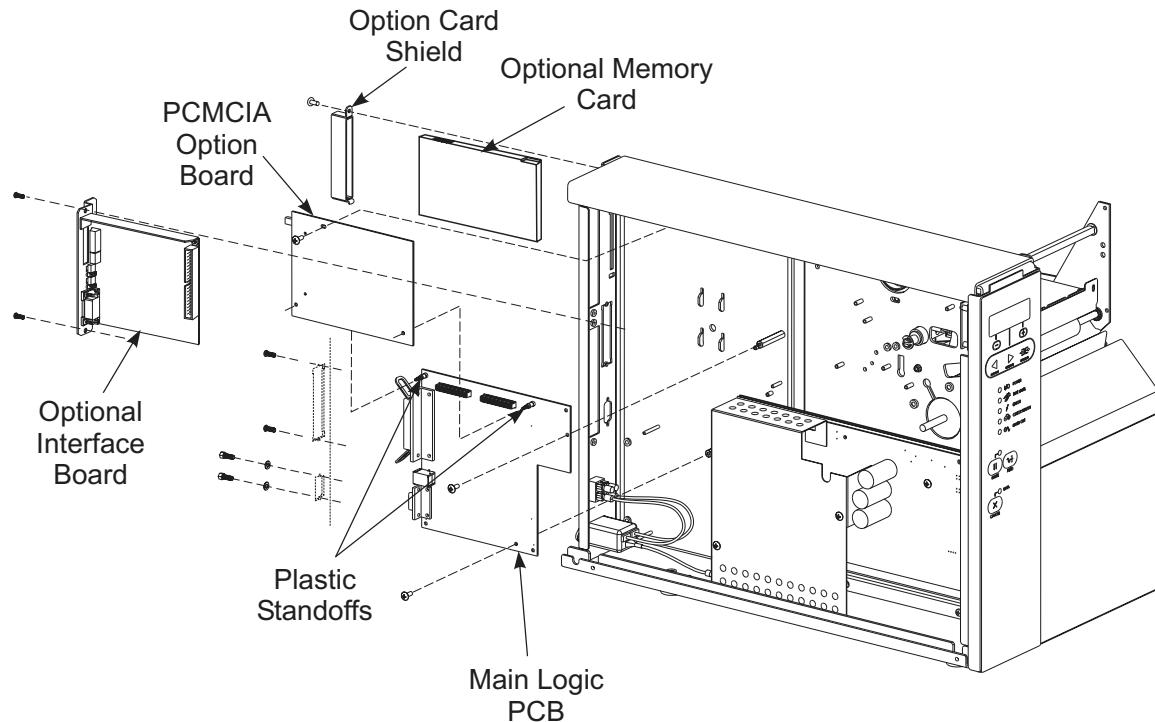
Main Logic Board Removal and Installation (Printer Configurations 10500-2XXX-XXXX and 10500-3XXX-XXXX)
